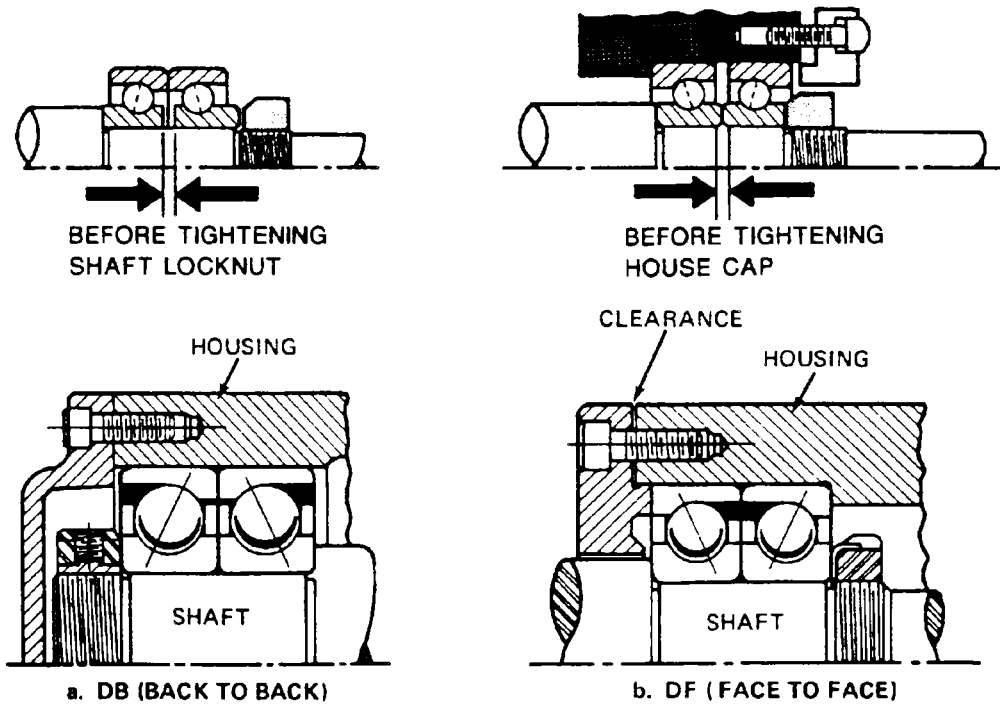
Duplex Bearing Arrangements Showing Relation of the Outer Ring Faces
